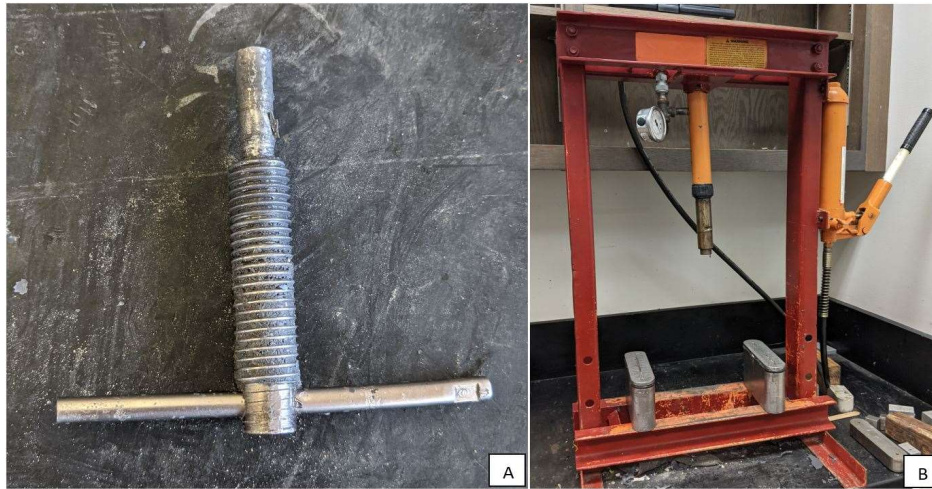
A) depicts the wing screw used to remove half of the mold and B) is the hydraulic press used to remove the sample from half of the mold.
